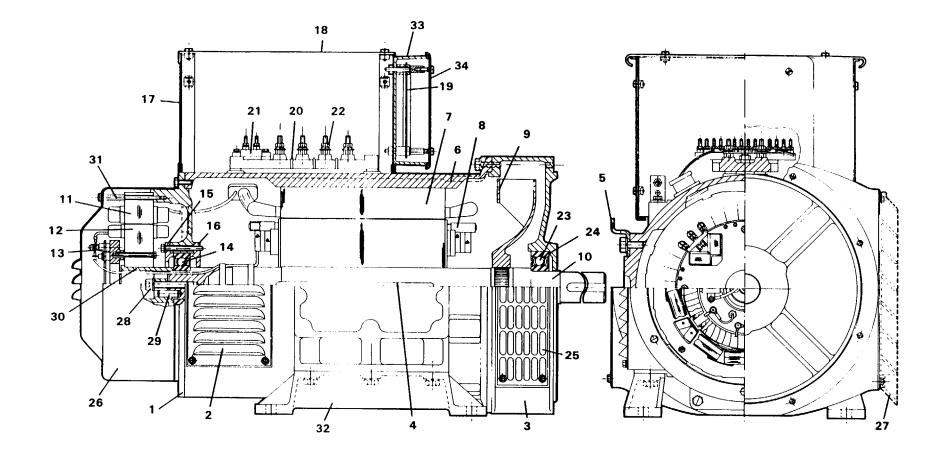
SC1 - 2 TWO BEARING MACHINE (OUTBOARD EXCITER)
